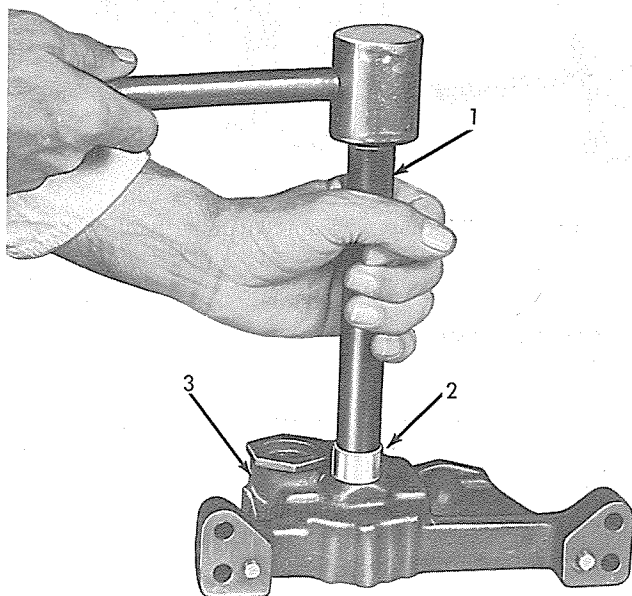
Installing Lubricating Oil Pump Housing Bushing (T-29545)
